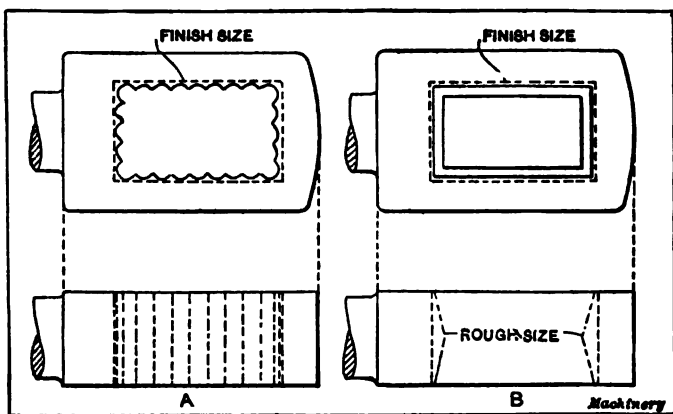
(A) Rod End Blocked Out by Drilling. (B) Rod with Forged Hole
